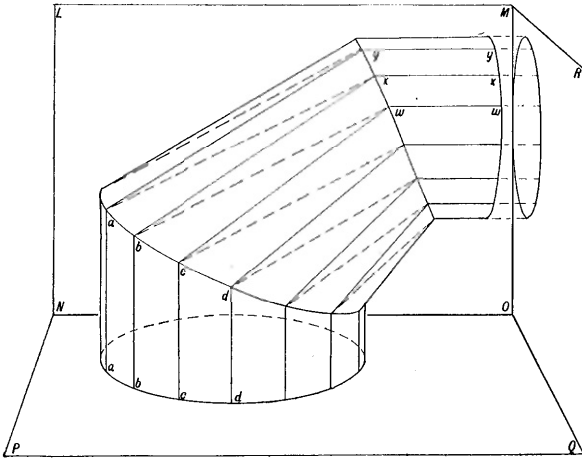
Photographic View of Three-pieced Tapering Elbow.
